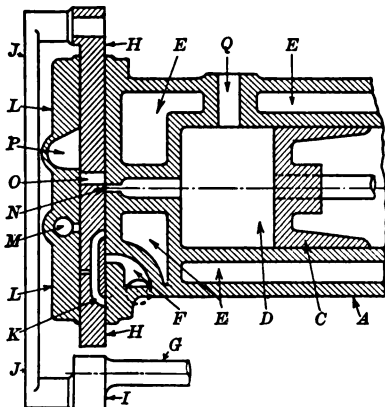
OTTO GAS ENGINE CYLINDER AND VALVE, HORIZONTAL SECTION
